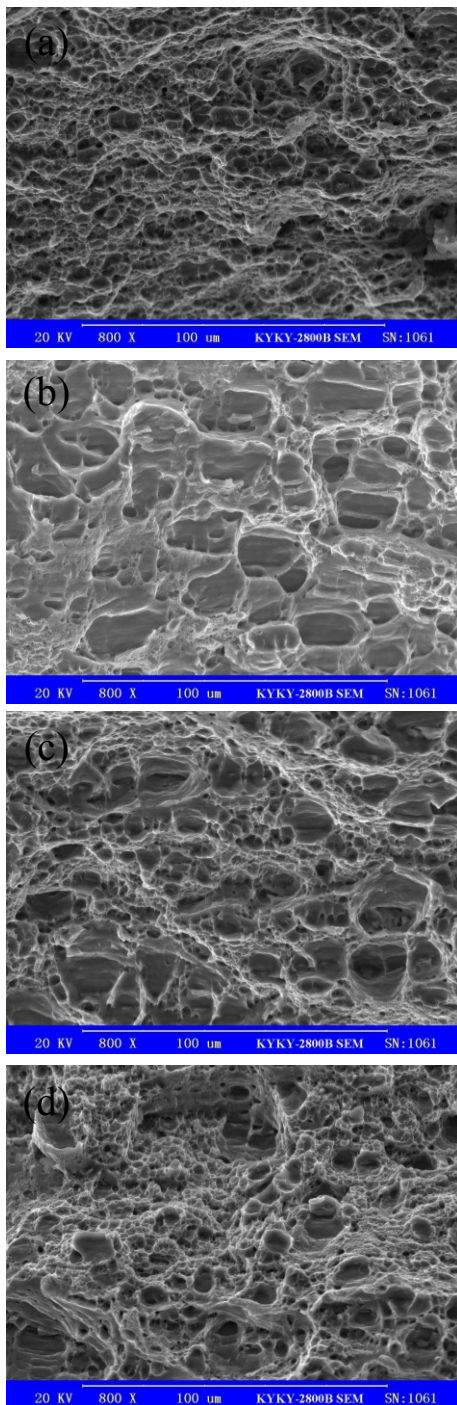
Fracture surface morphologies of joints under different rotational velocities: (a) 800, (b)1000, (c)1300 and (d)1500 rpm.
